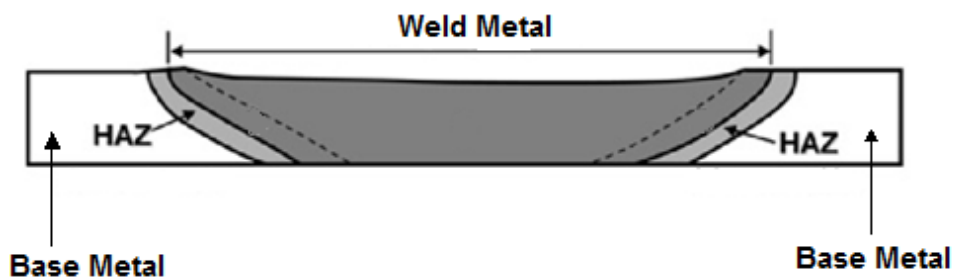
Basic Regions of a FSW Weldment [6].
